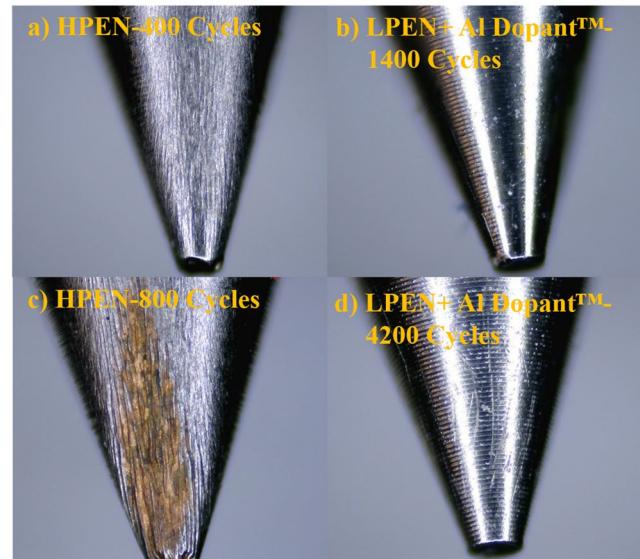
Appearance of hot runner tip after testing in an injection molding.
